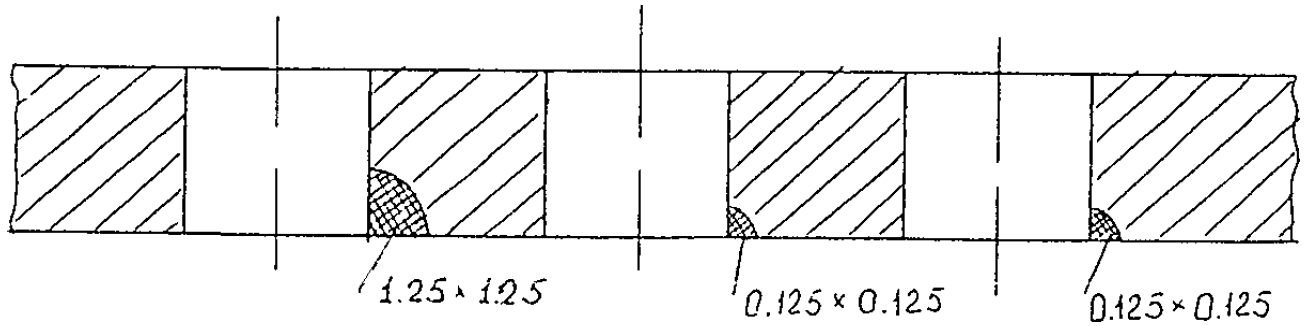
Presence of Manufacturing Defects on One Side of Each Hole in One Load-Bearing Section
